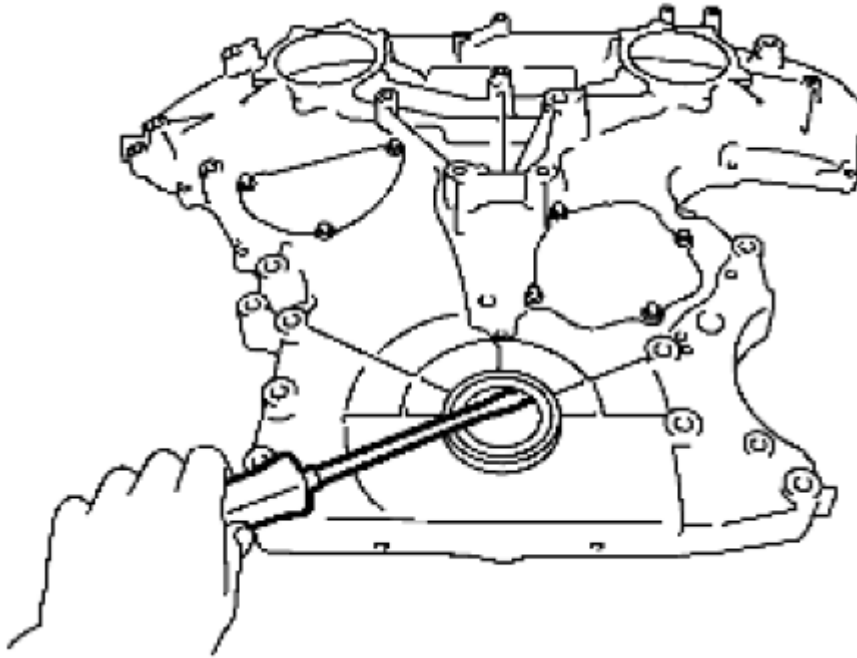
Removing Front Oil Seal From Front Timing Chain Case Using Suitable Tool
